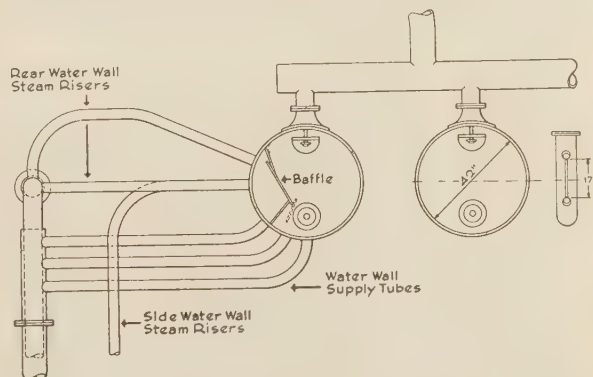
No. 10-C AND 10-D BOILERS. CROSS SECTION SHOWING LOCATION OF STEAM RISERS AND STEAM-DRUM BAFFLING
